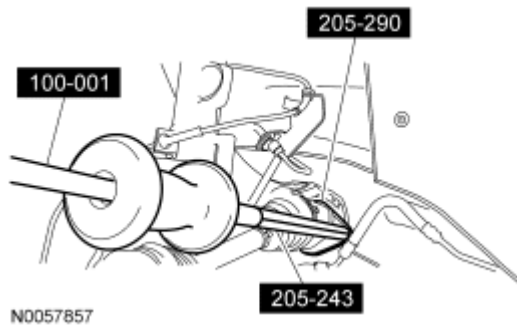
Separating LH Halfshaft From Transaxle Using Special Tools (100-001), (205-243) & (205-290)
